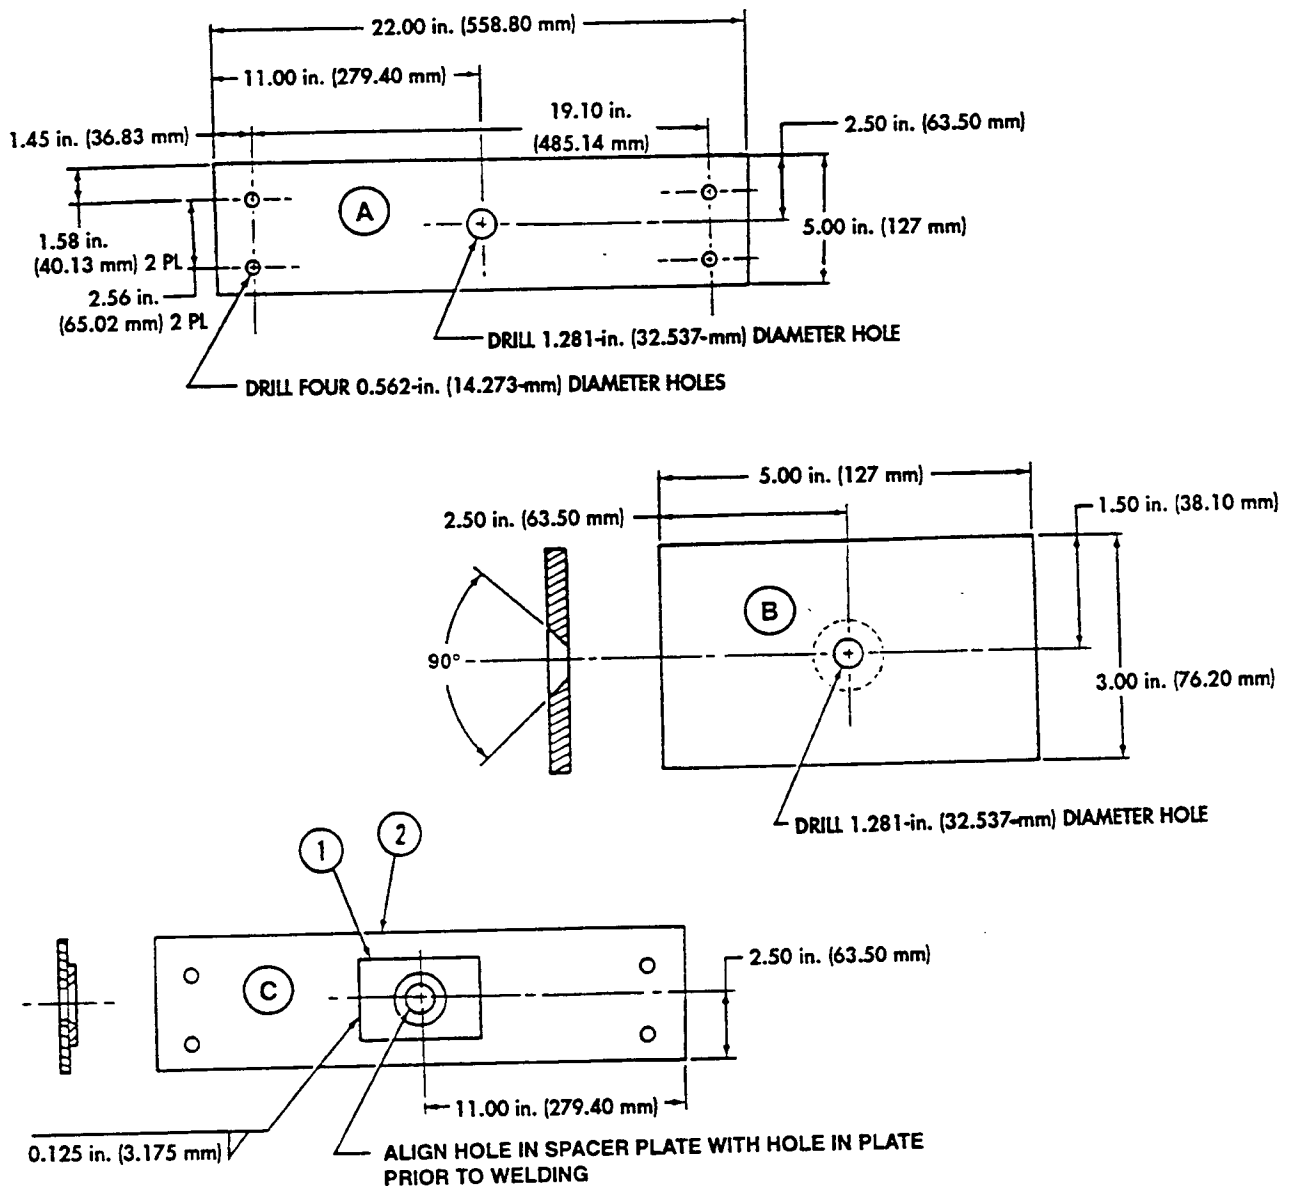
Front Bumper Tow Pintle Plate Assembly (Front), 5992405.
